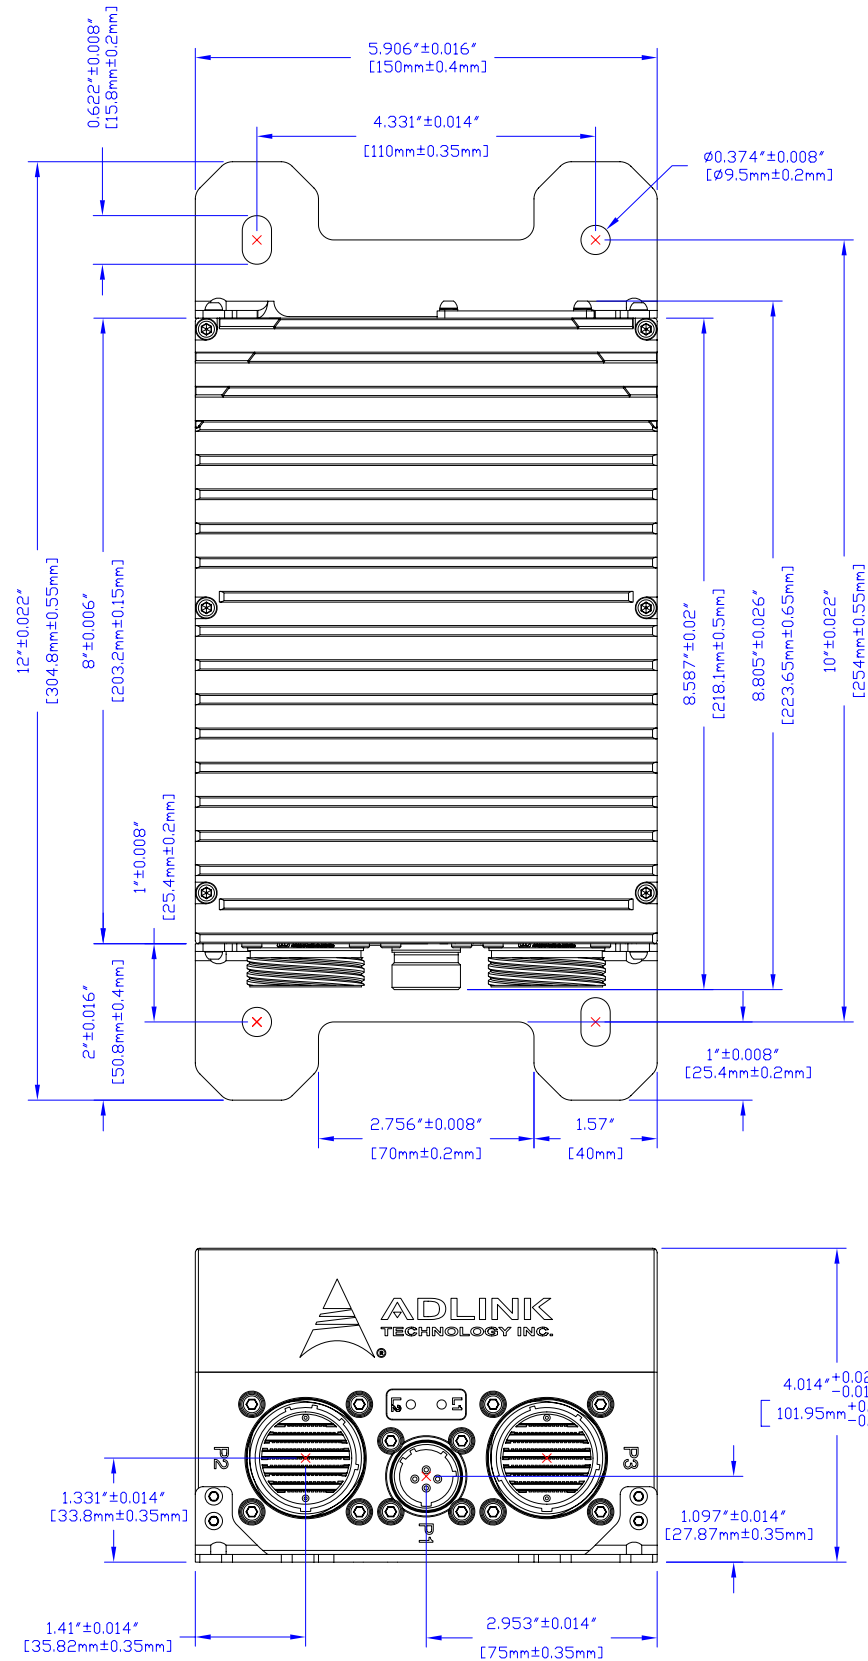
Top and Front Views of “HH” Enclosure with Mounting Dimensions
